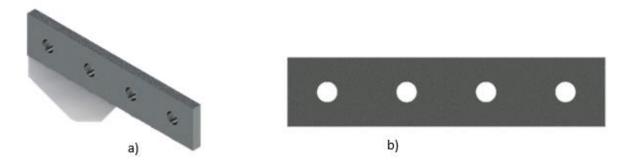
Flat bracket: a) isometric view, b) front view.
